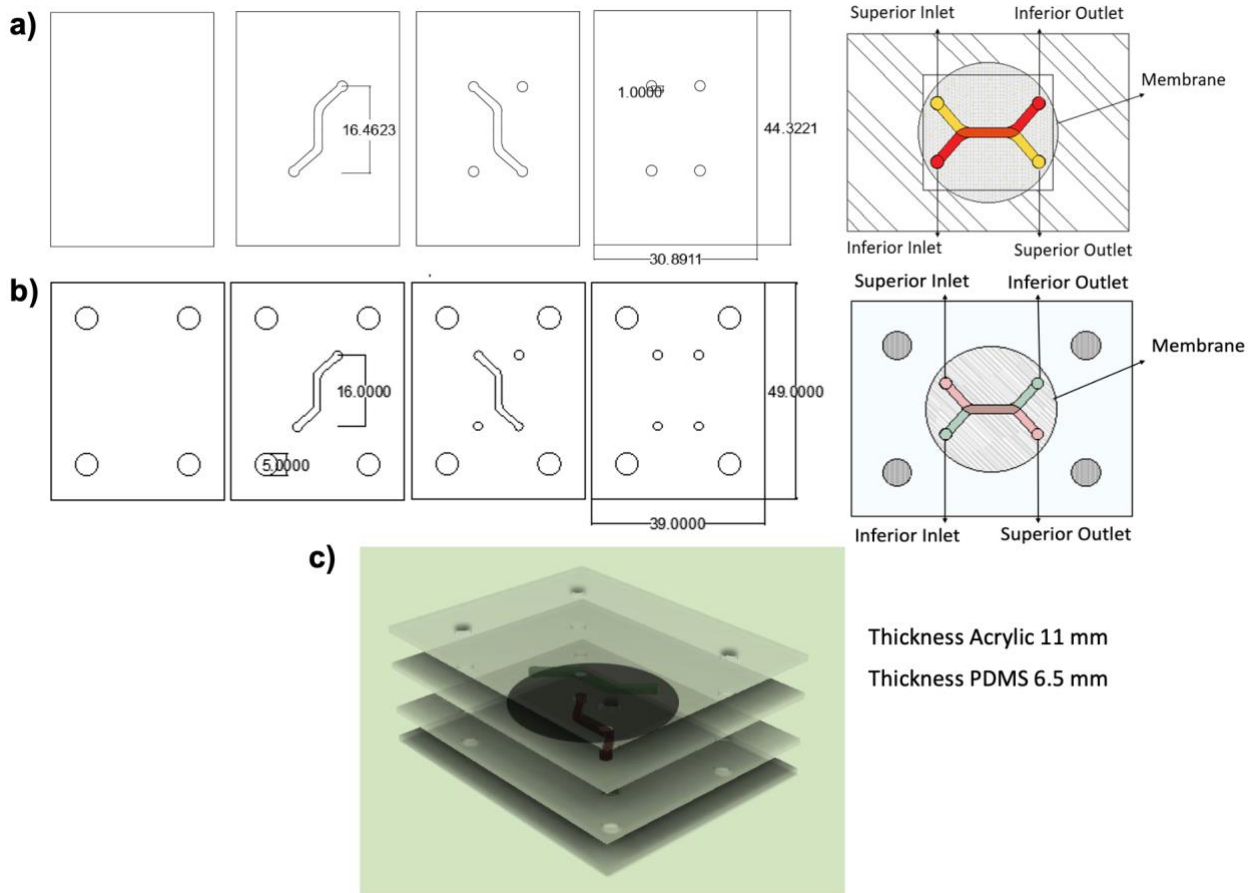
Design, dimensions and 3D view of the loaC #3 a) Pieces of the chip with dimensions b) Top view with key components of the chip and c) 3D view with chip assembly.
